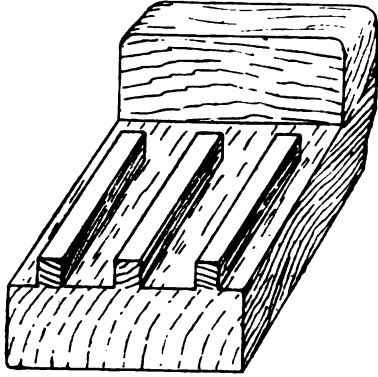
PERSPECTIVE VIEW OF PATTERN.
